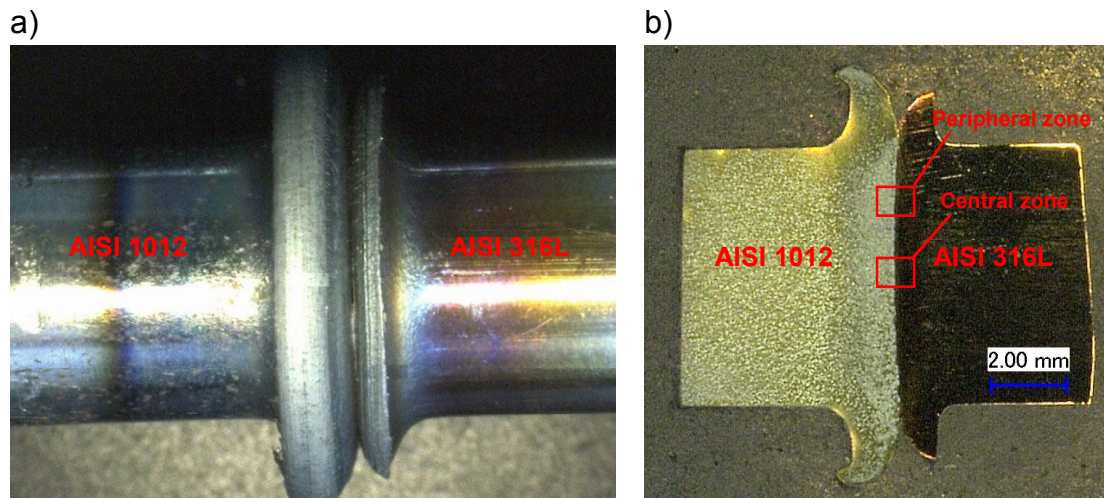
The macrograph of the welded specimen under optimum welding conditions a) whole weld specimen and b) cross sectional view.
